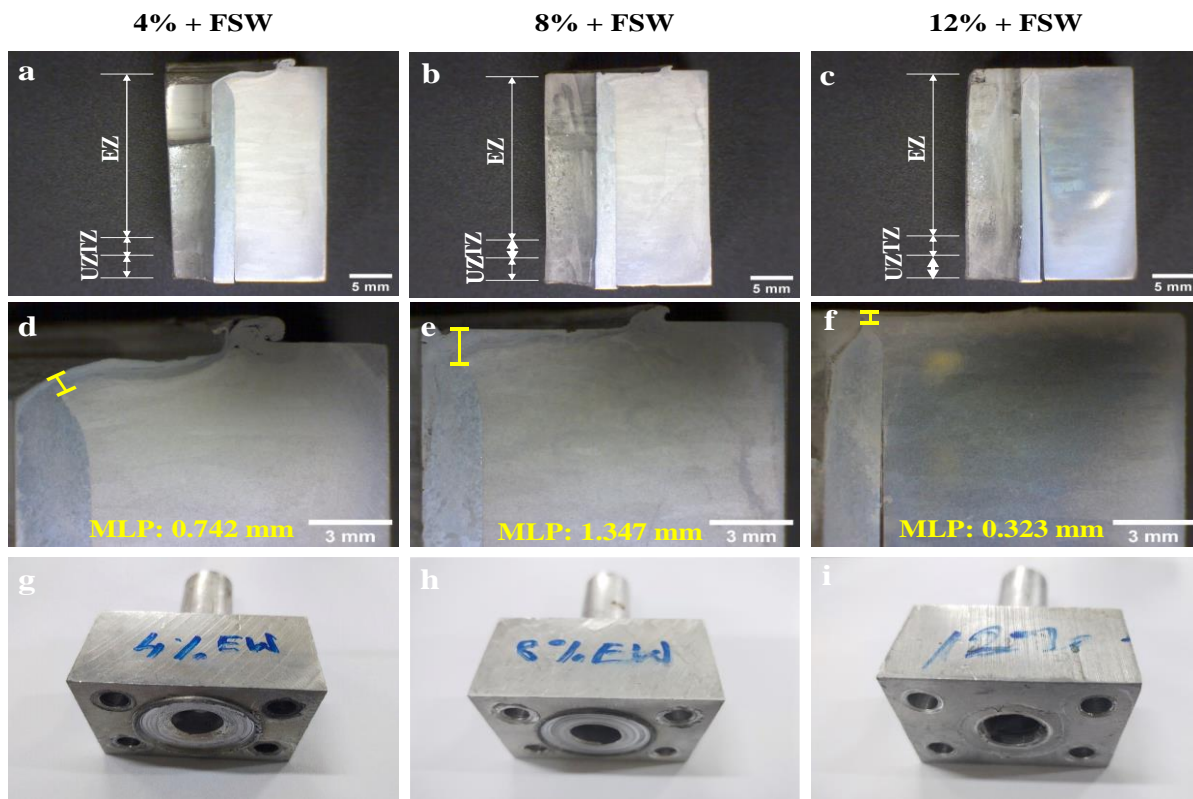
Macro-images of hybrid welded-expanded joints at three conditions. (UZ: Unexpanded zone, TZ: Transition zone, EZ: Expanded zone).
